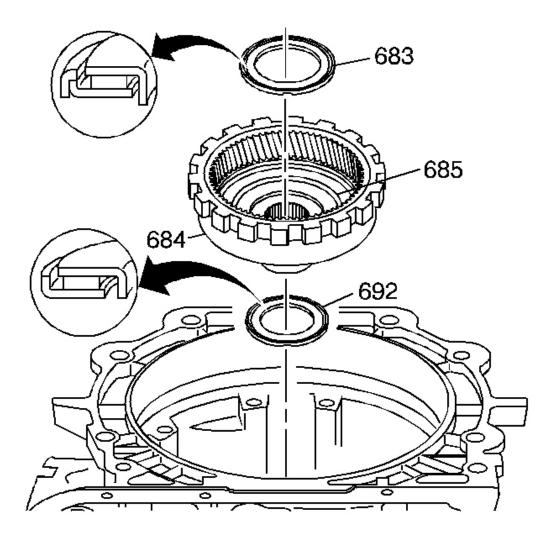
Locating Low & Reverse Clutch Components Courtesy of GENERAL MOTORS CORP.
